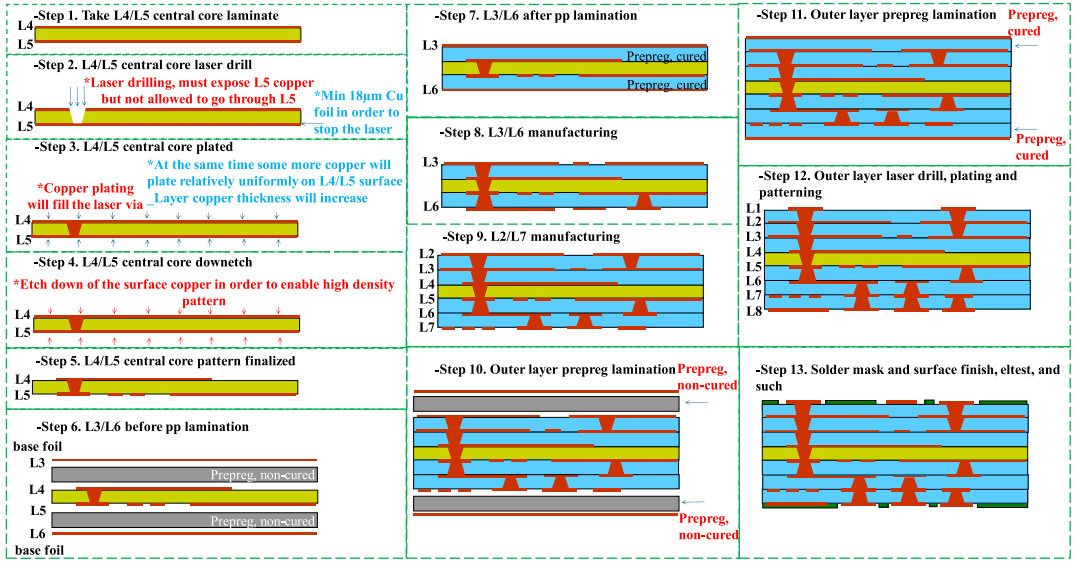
13 steps in the fabrication process of “any-layer PCB technology” [21].
